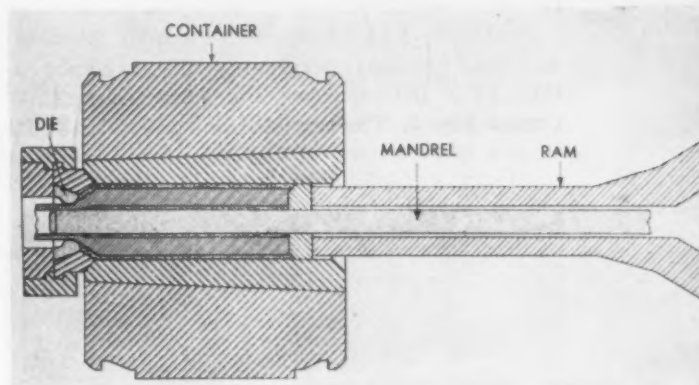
As ram of 2500-ton extrusion press moves forward, metal is squeezed out between die and mandrel.
